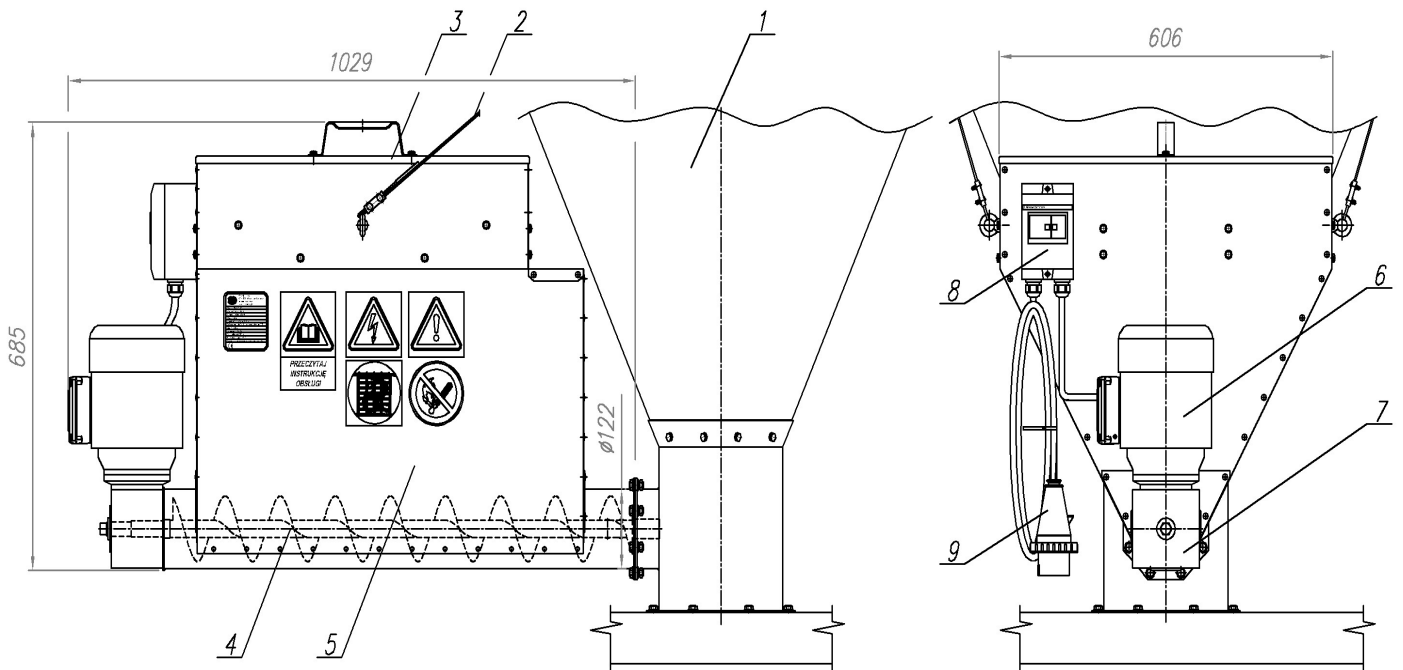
MS-KOSZ - overview diagram: 1.- mixer with the port for MS-KOSZ, 2 – line, 3. - cover, 4 – screw conveyor, 5 – intake hopper, 6 – motor, 7.- screw reducer, 8 – drive switch, 9 – cable and the power plug
